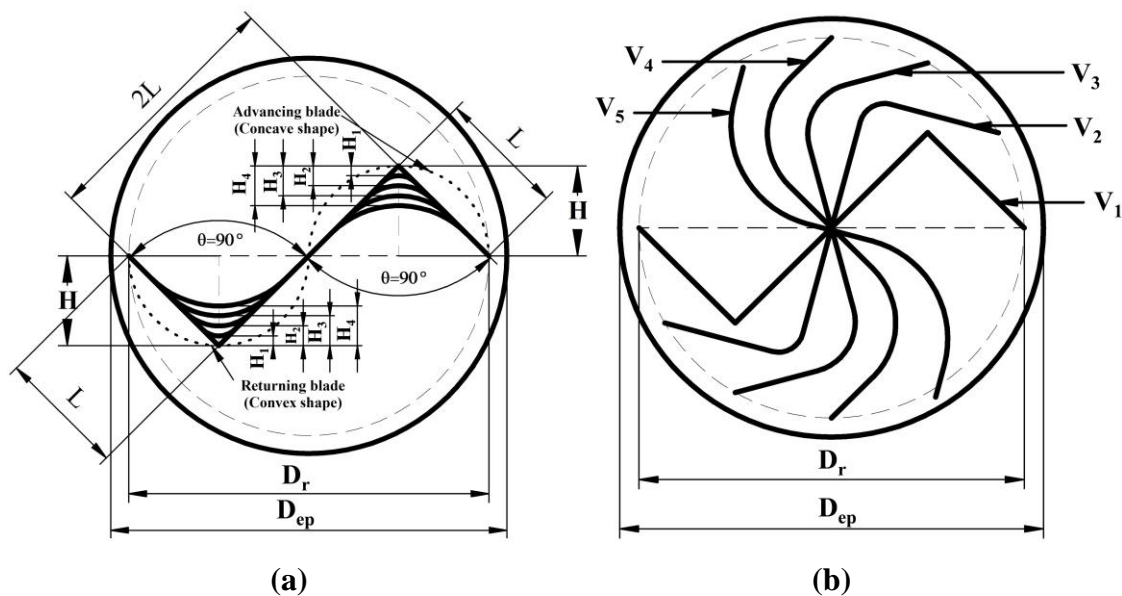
(a) Geometrical parameters of different V-shaped rotor blade profiles, (b) rotor blades (V₁-V₅) at different angular positions
